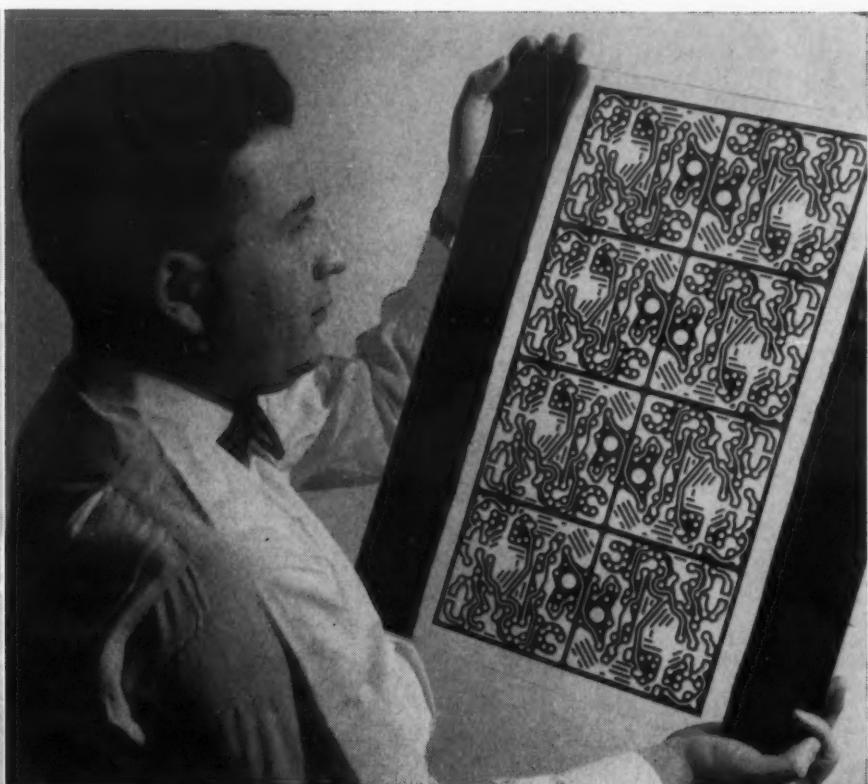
Printed-circuit master drawing reproduced for production.
